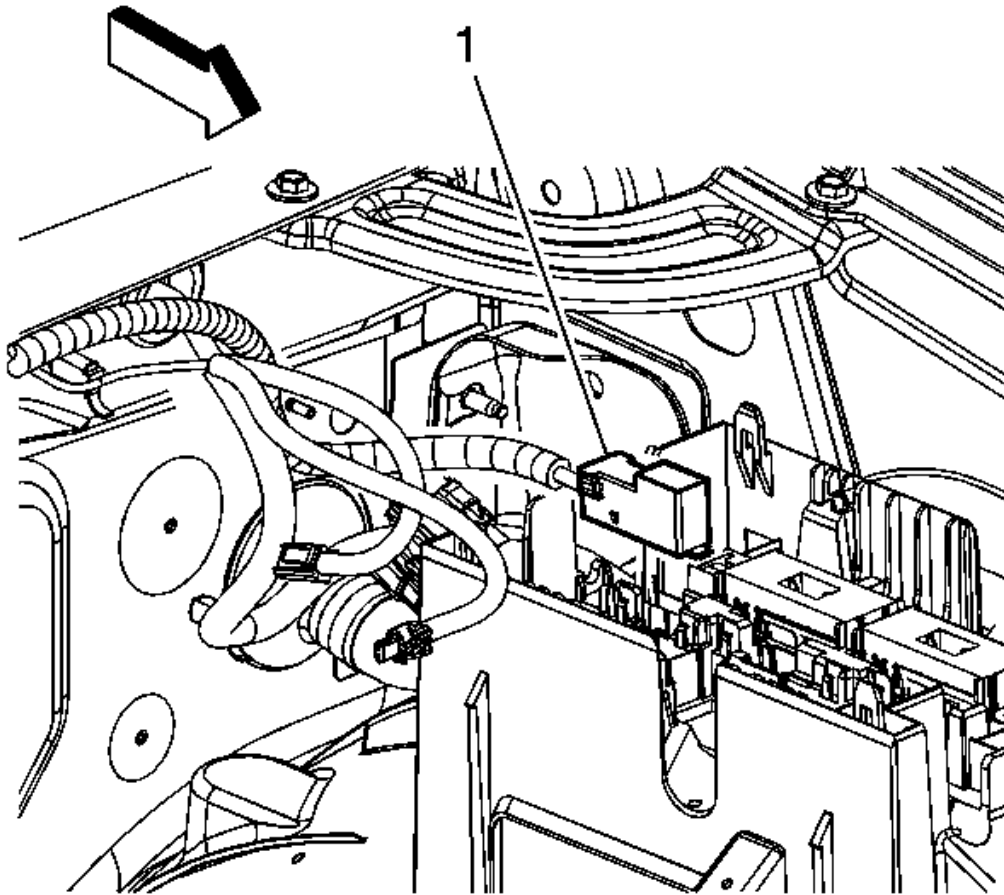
View Of Positive Battery Cable Connector & (UBEC)
